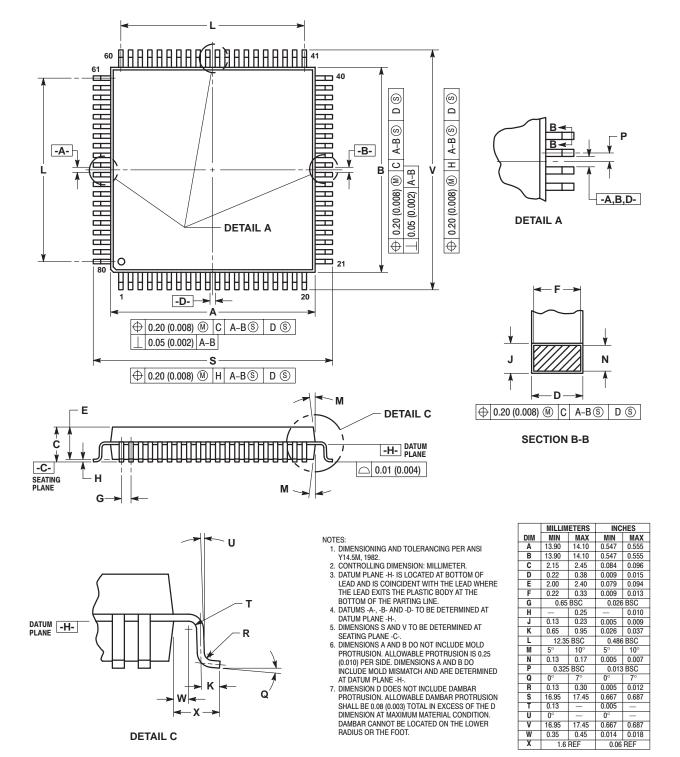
80-Pin QFP Mechanical Dimensions
